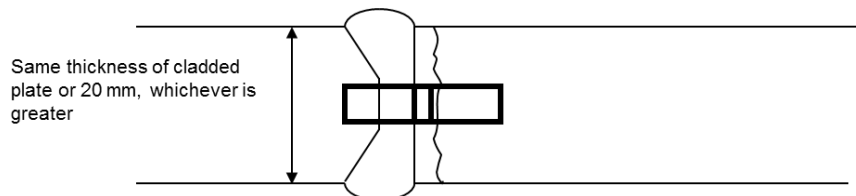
Location for removal of CVN specimens from butt weld joints
